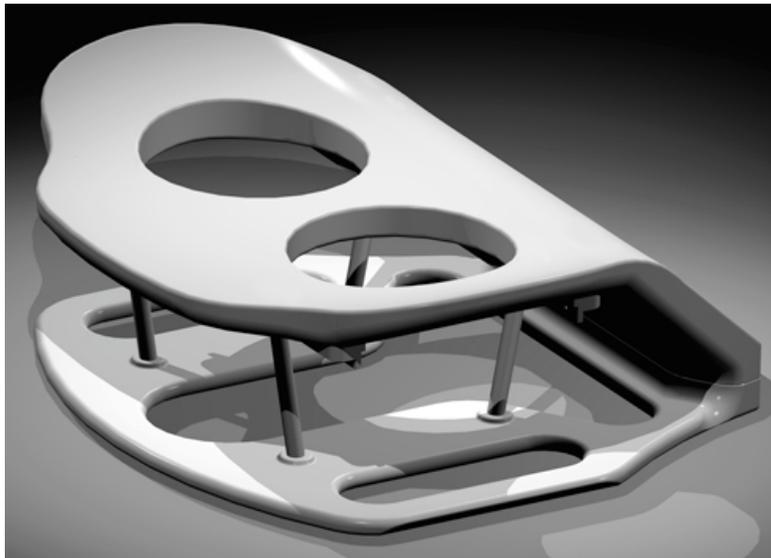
Final design of the InsightMRI breast coil housing concept.
